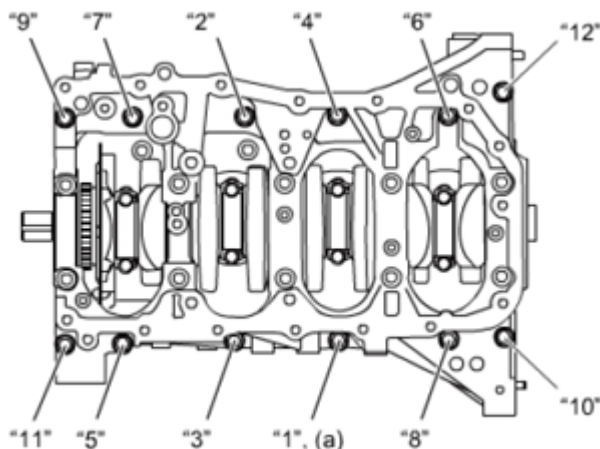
Identifying Crank Case Bolt Tightening Sequence
